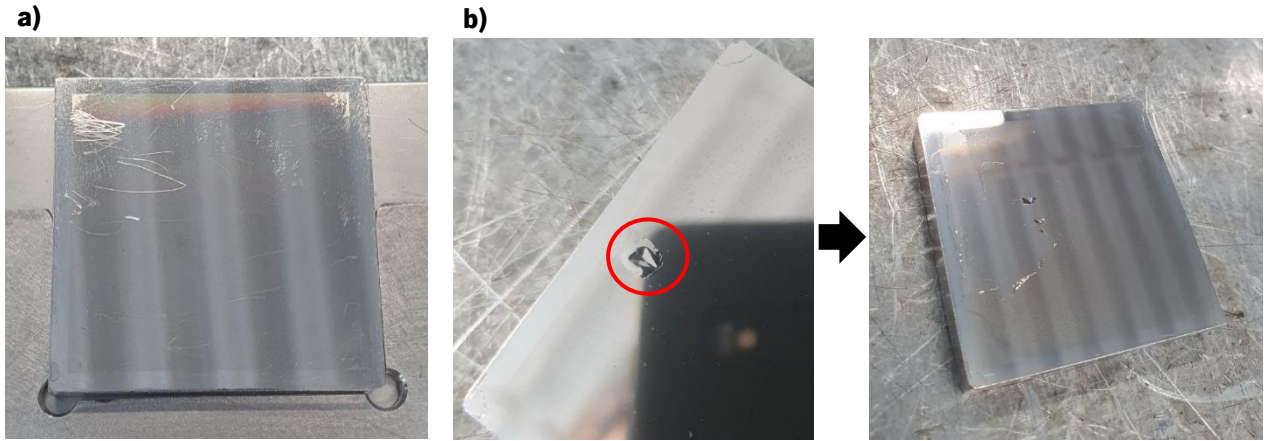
Nickel inserts available to be used in this study. a) Mold 1 (50 x 50 mm) - Damaged mold from previous studies. b) Mold 2 (50 x 50 mm) - Mold that suffered degradation on its surface, starting with the formation of a bubble and then starting to peel off in some regions with the increase of the number of experiments performed.
